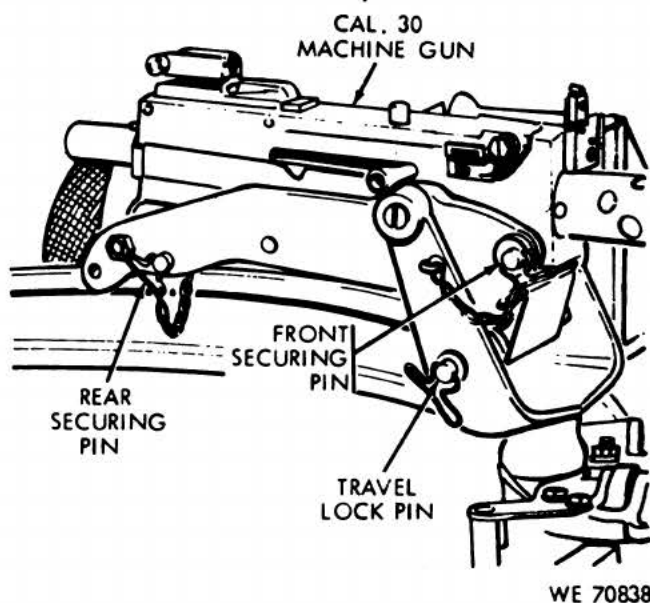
Controls for machine gun mount mounting a caliber .30 machine gun.
